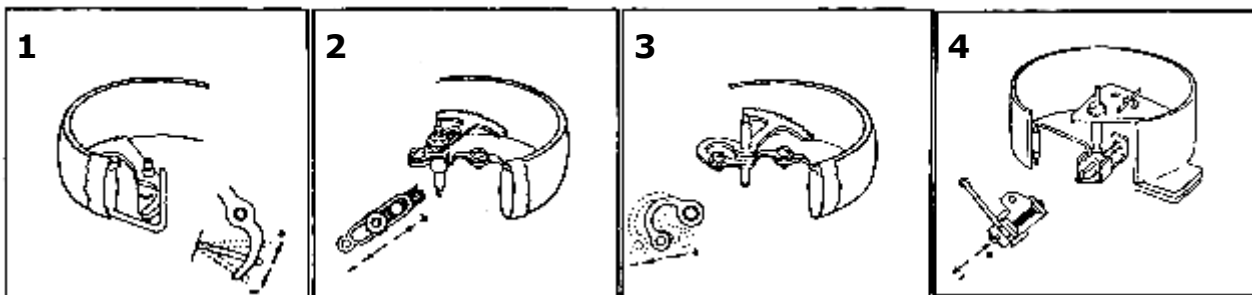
showing Bourdon tube to pointer assembly link styles used in Smiths gauges.
